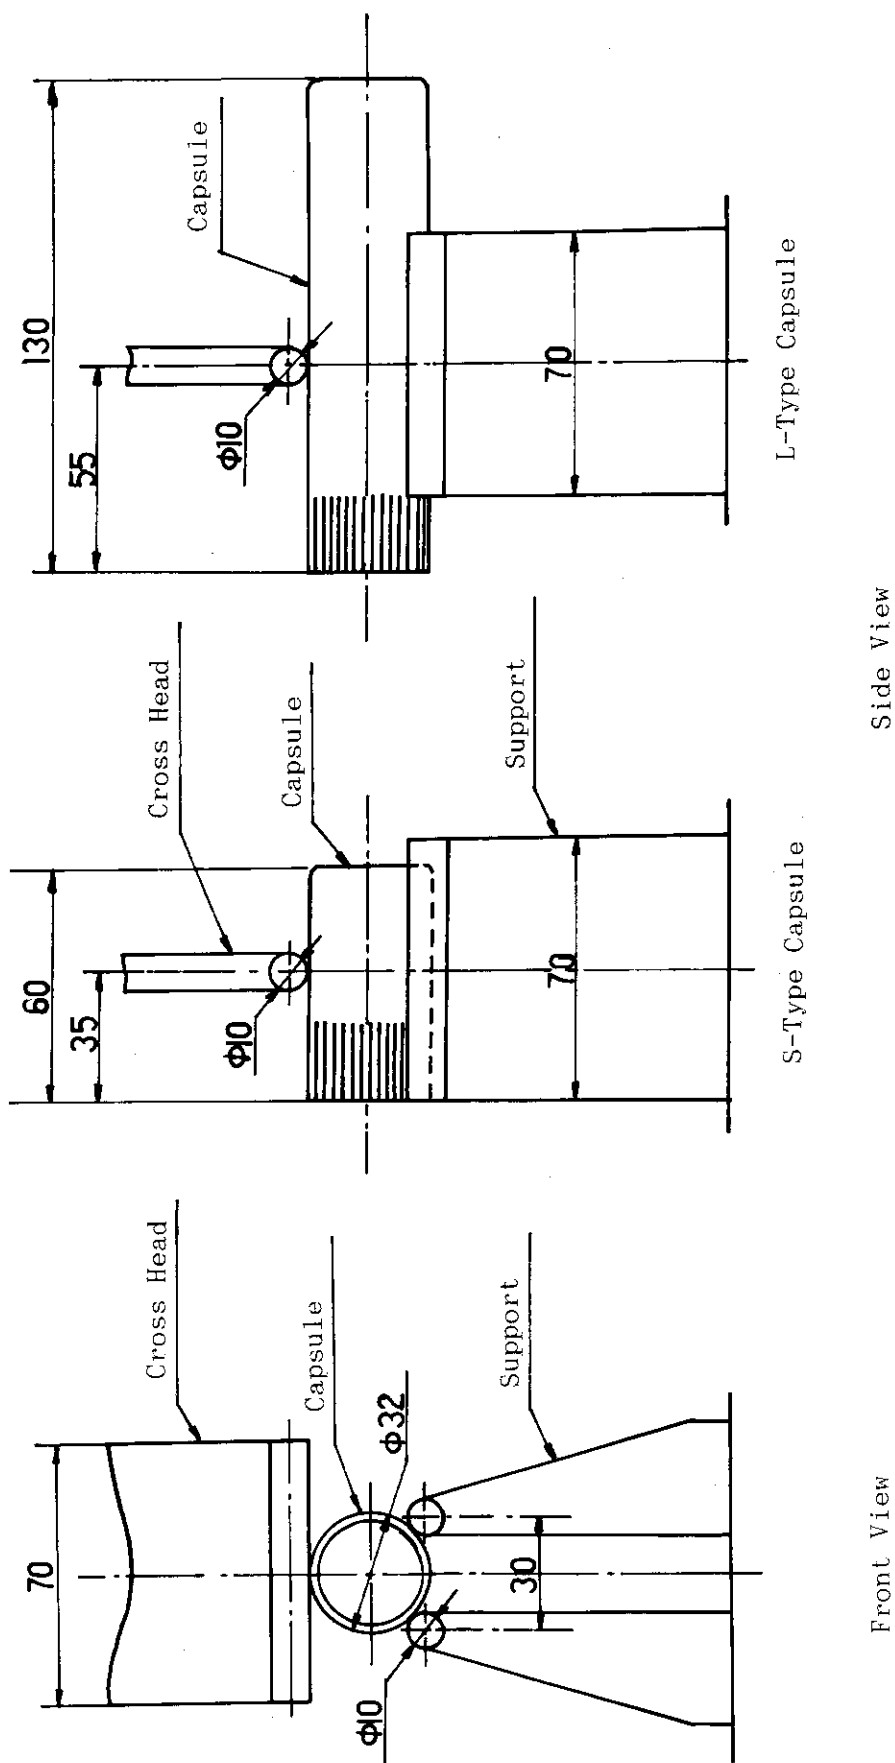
Arrangement of capsule and cross head for compression fracture test
